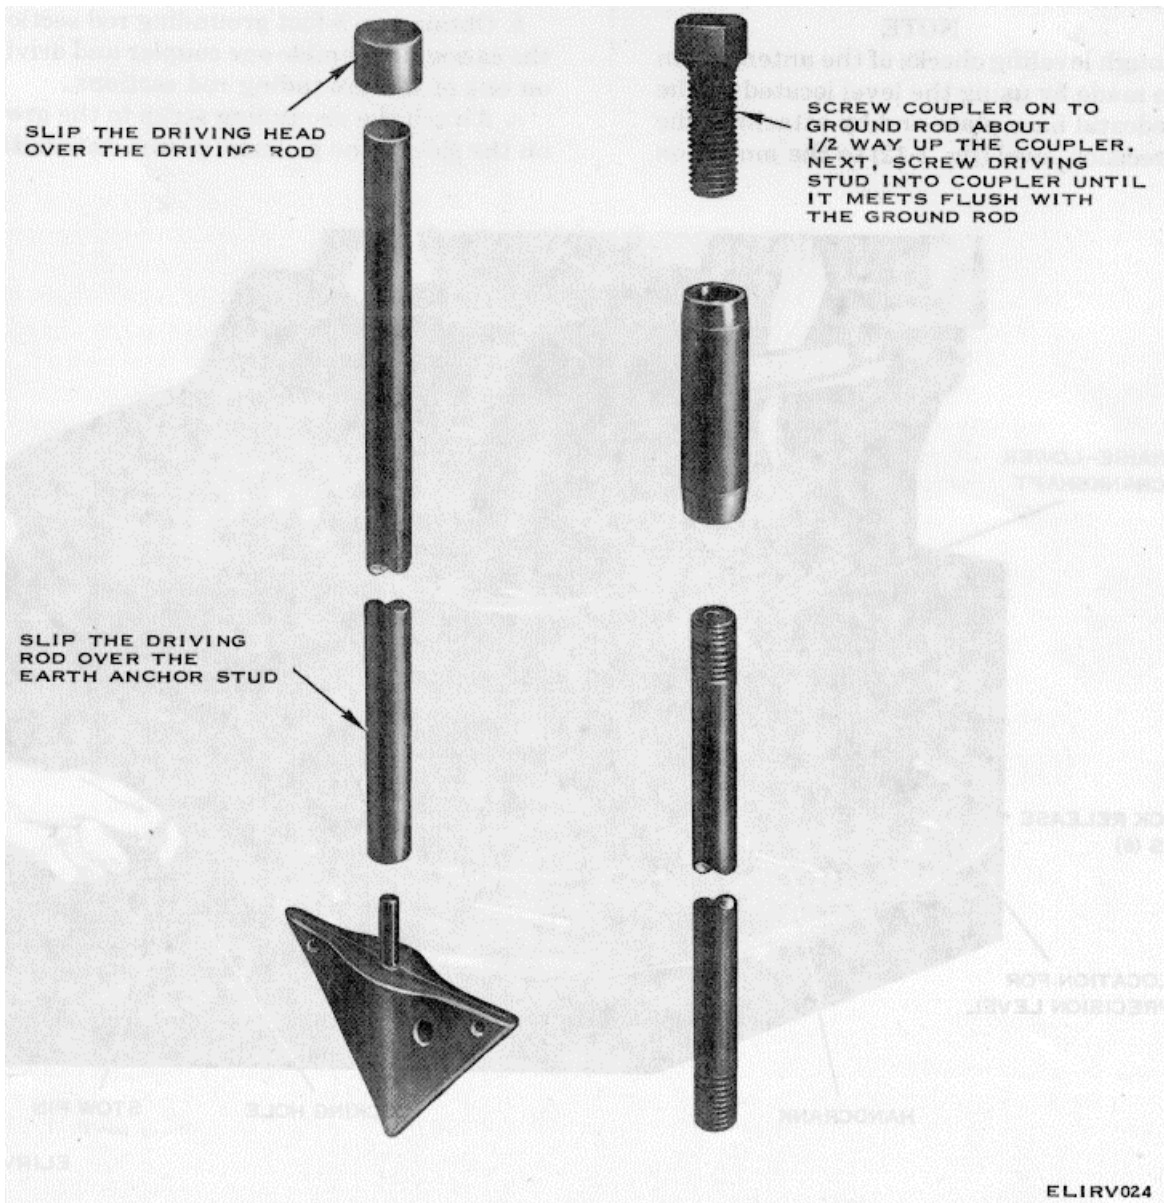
Typical ground rod and earth anchor driving hardware.
